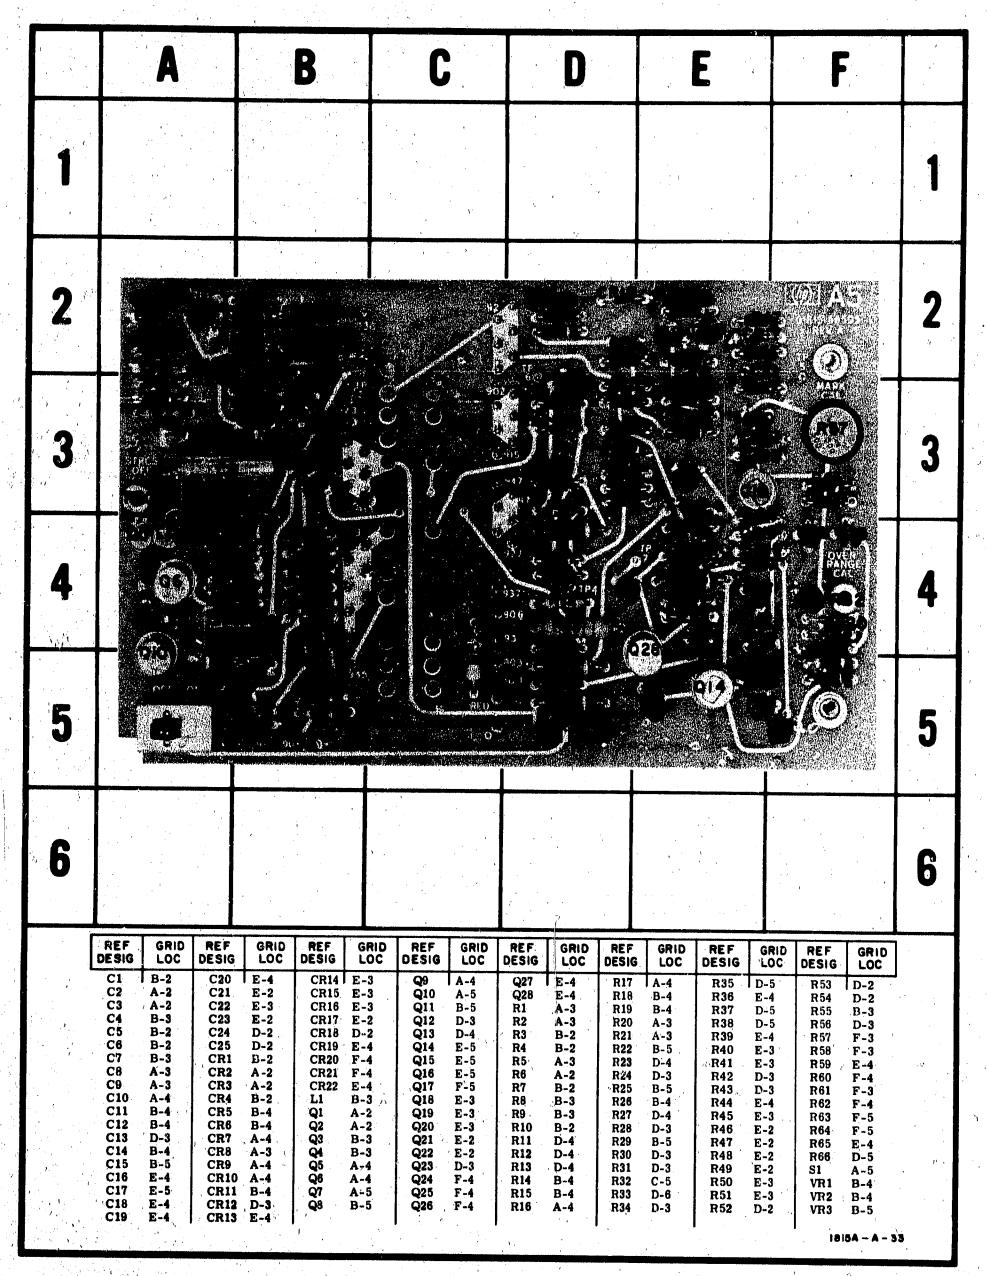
Staircase and Marker Dot Assembly A5 Parts Locations
